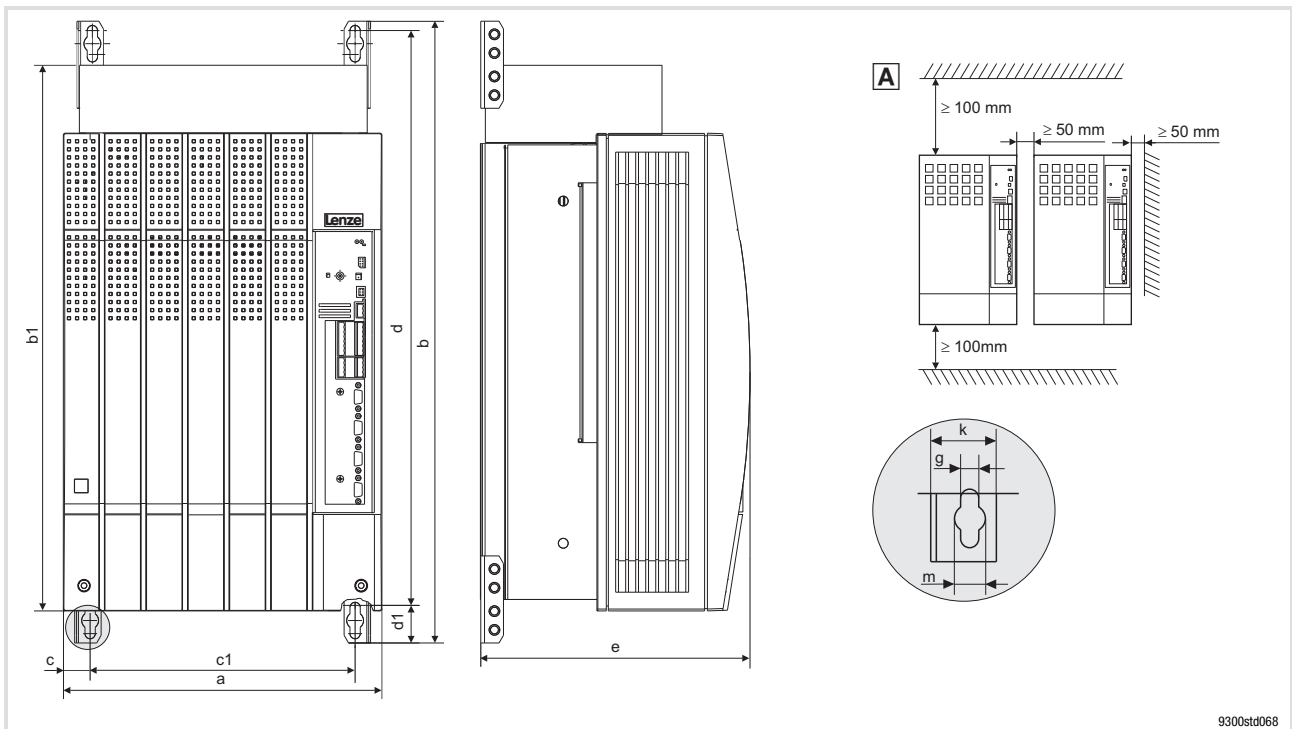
Standard mounting with fixing brackets 45 kW
